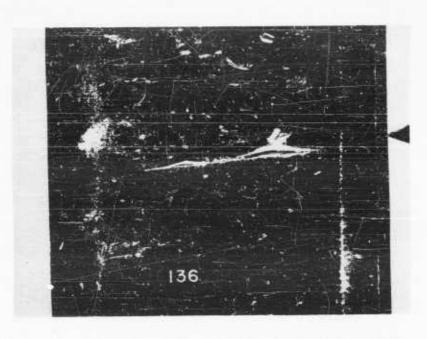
FAILURE IN SPECIMEN NO. 136
